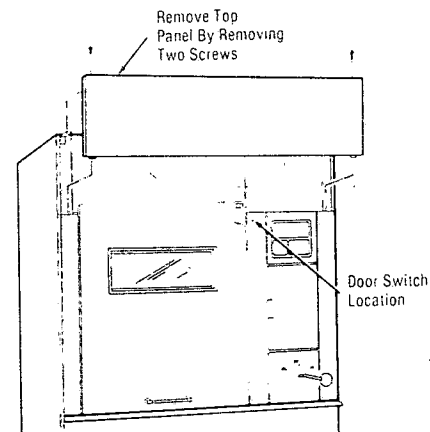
SLIDING DOOR SWITCH ADJUSTMENT.
